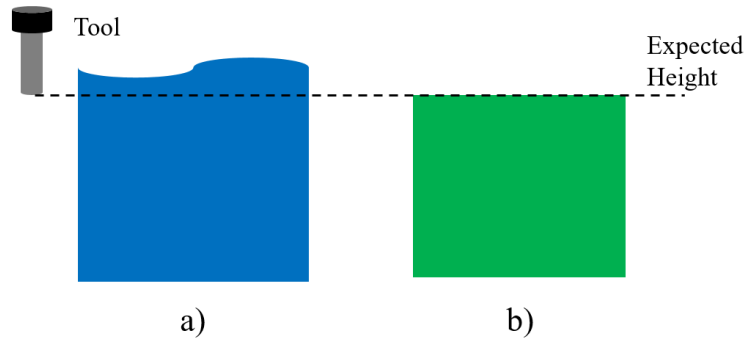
a) As-built surface with built-up defects, b) Faced and qualified surface
